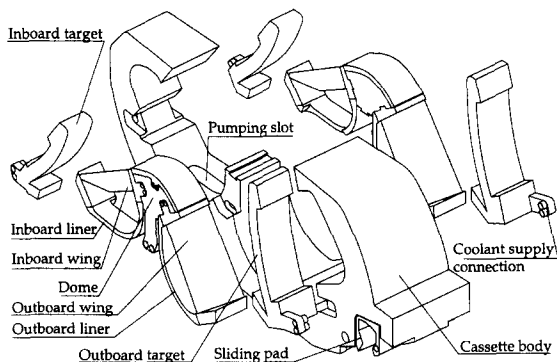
Exploded view of divertor cassette showing detachable high-heat-flux components.
